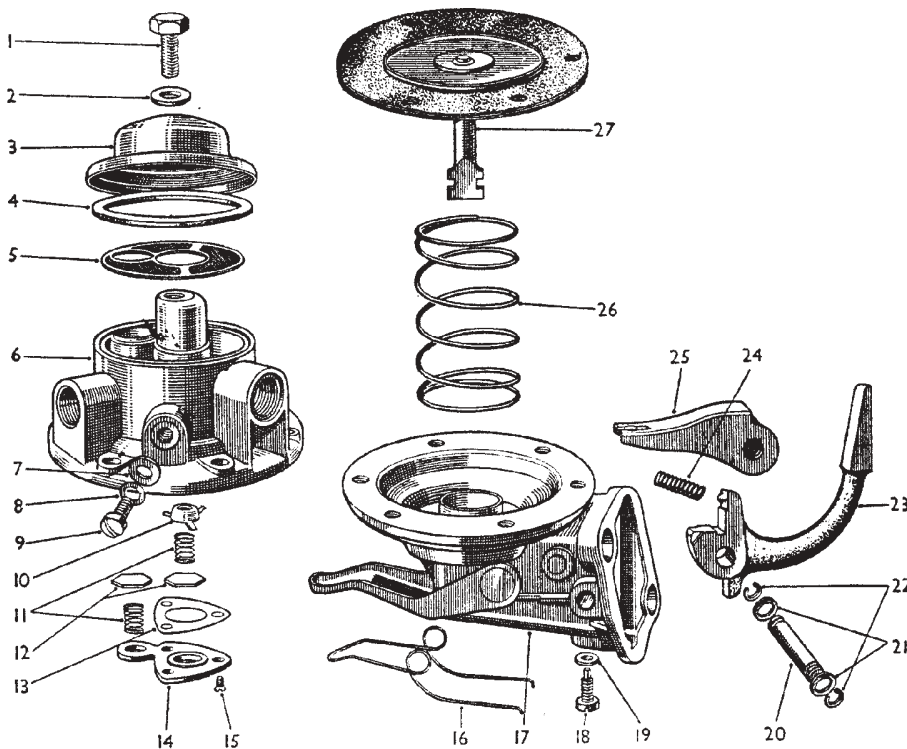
Showing Complete Components of Austin A.C. Petrol Pump.
